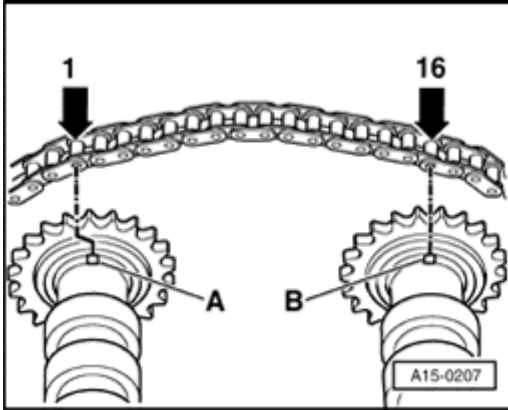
First And Sixteenth Drive Chain Rollers Installed On Chain Gears
